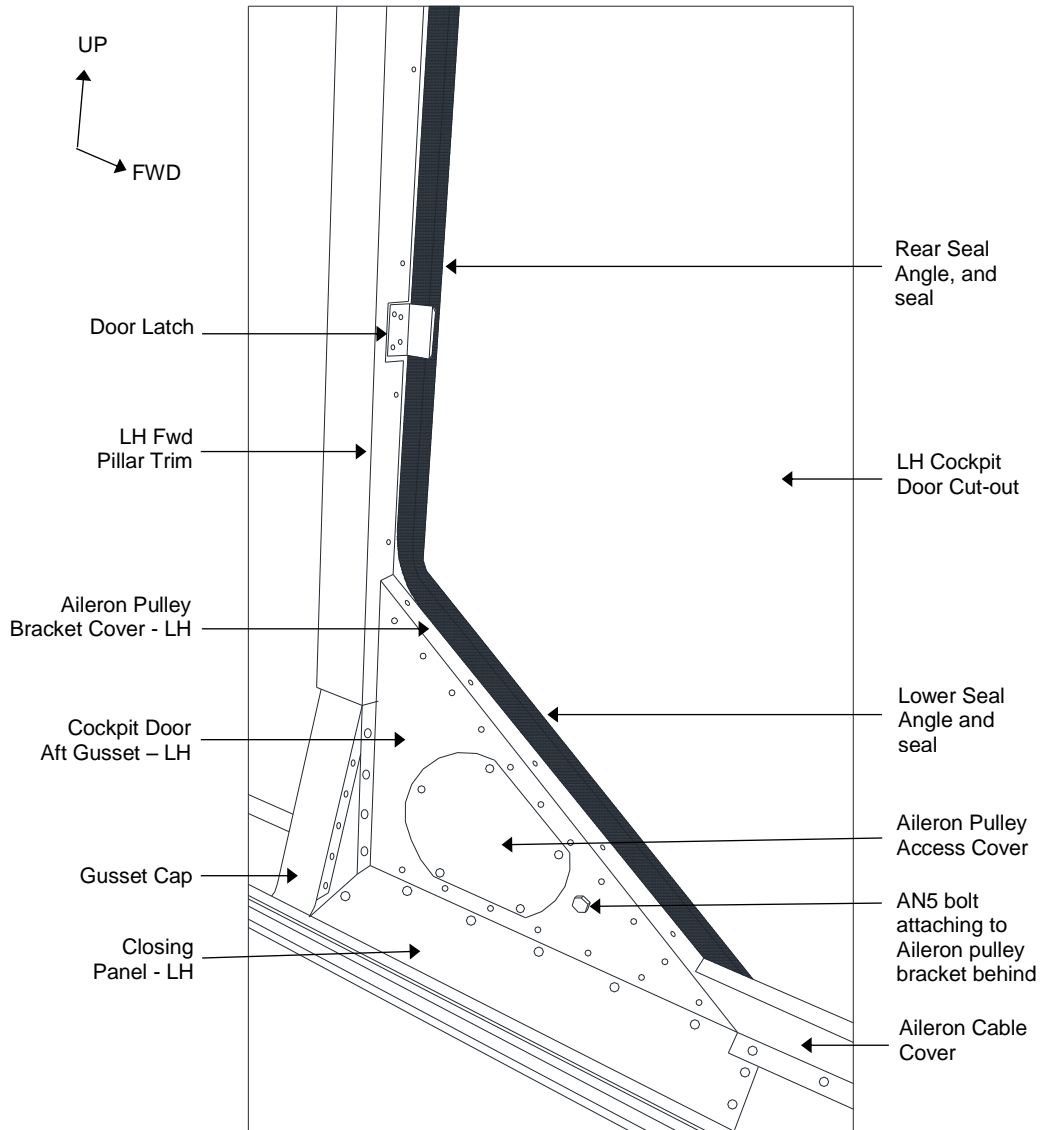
Cockpit Door Aft gusset – Component Removal at Rib 5 LHS
